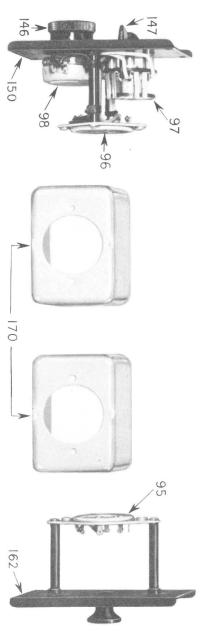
Type CBY-23154 Switch Panel and Type CBY-49109 Switch Panel Adapter
